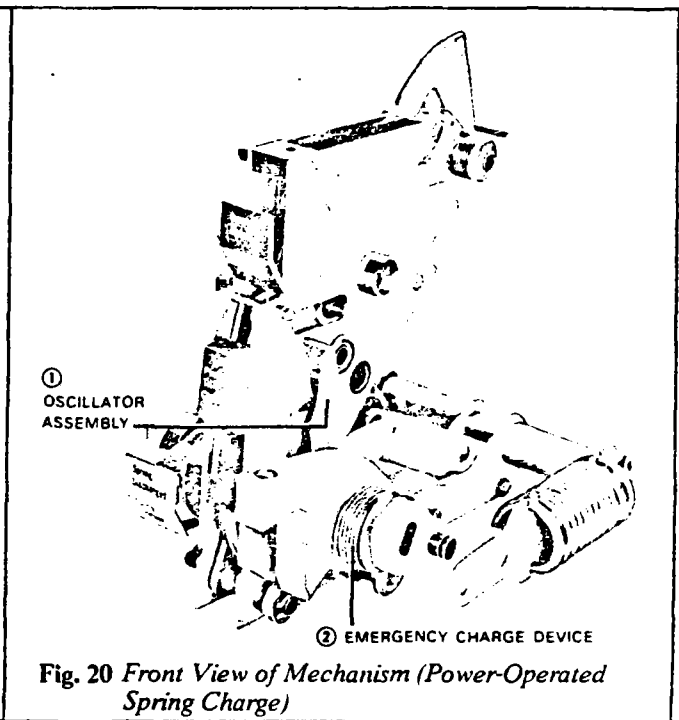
Front View of Mechanism (Power-Operated Spring Charge)
